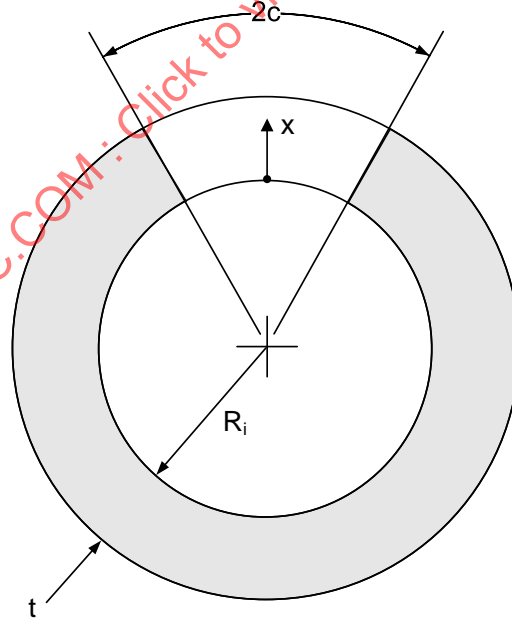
B.12 – Cylinder – Through-wall Crack, Circumferential Direction
